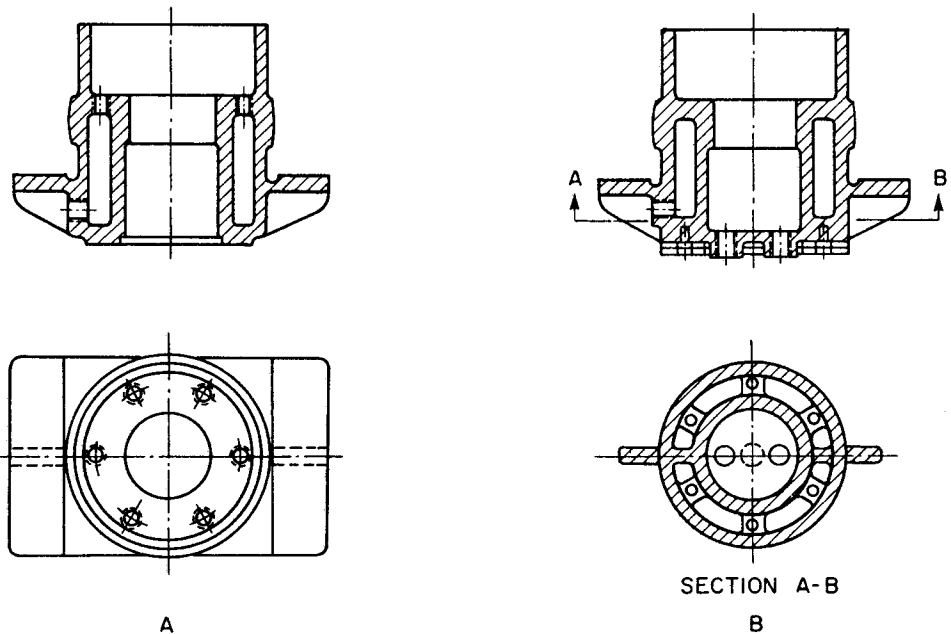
Complicated cored design, best produced as a cast weld unit (3).
